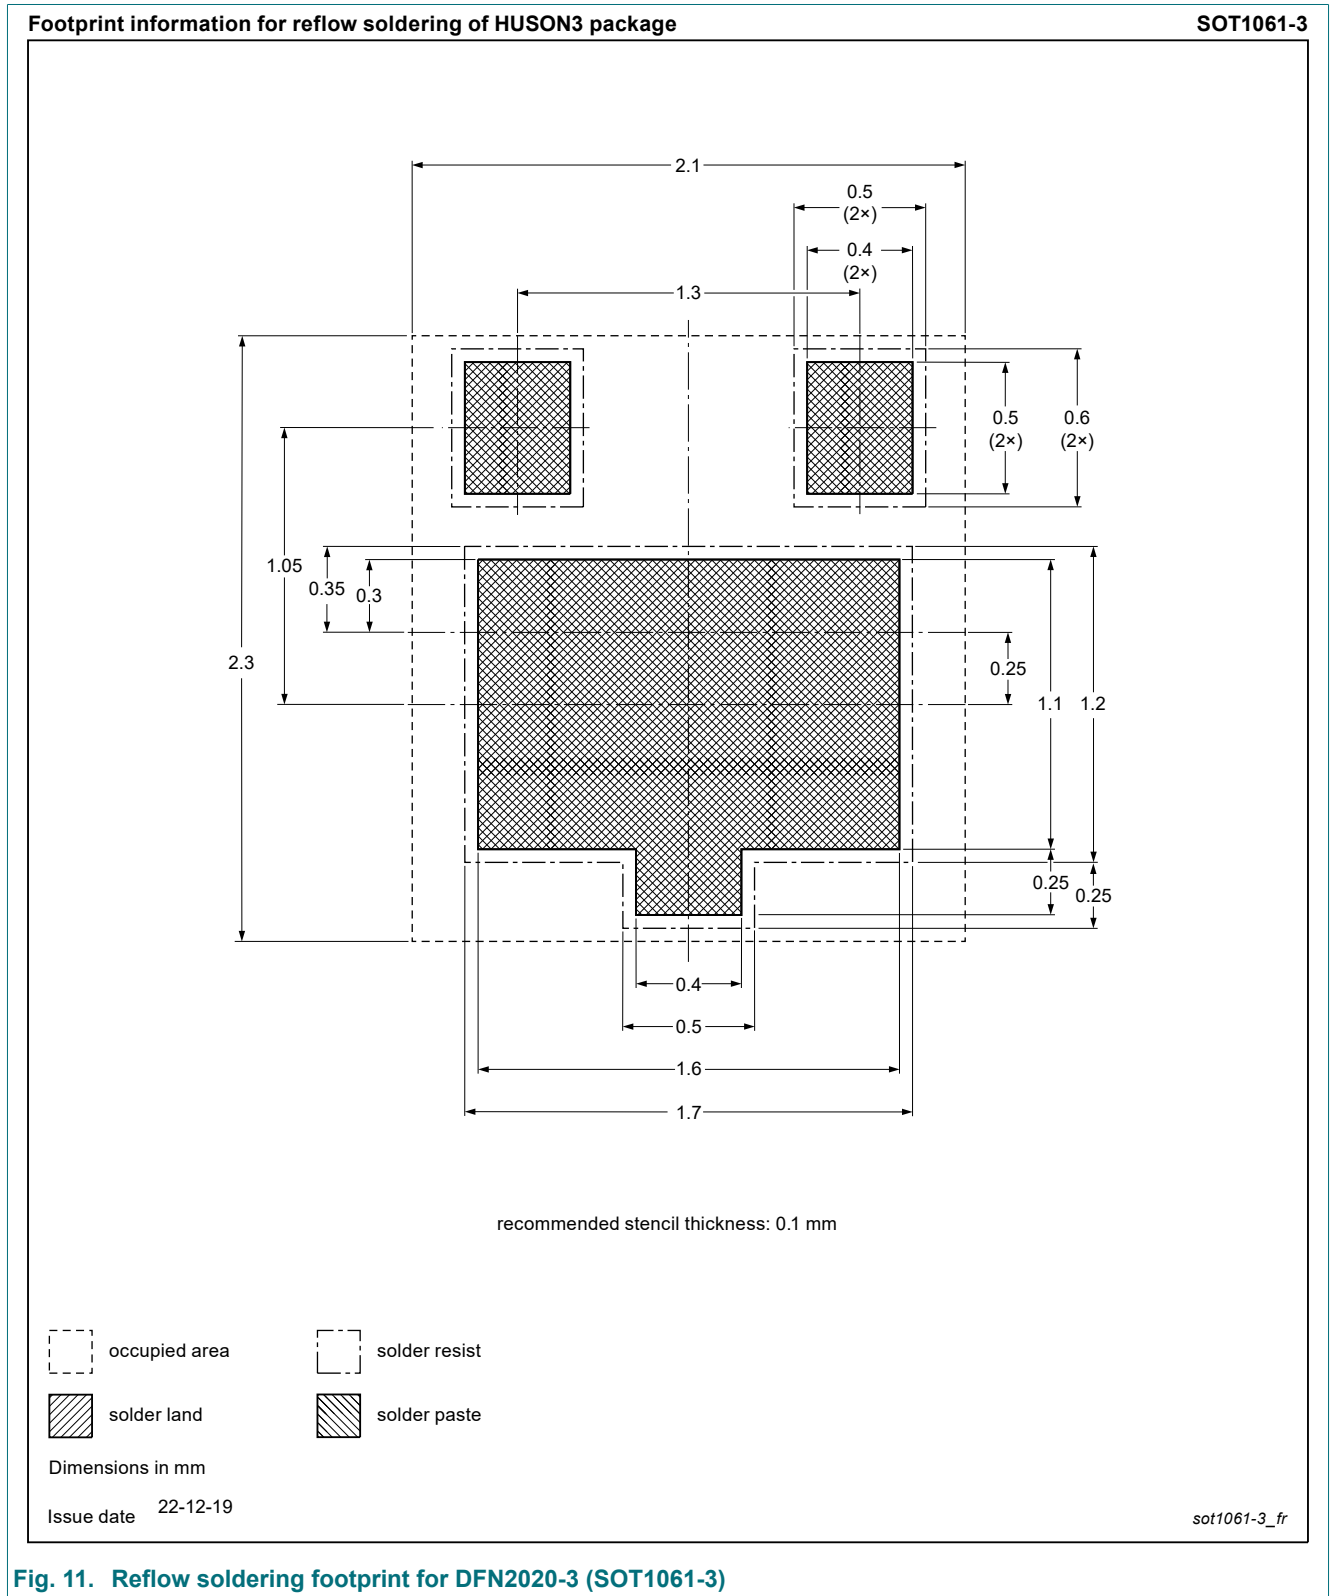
Reflow soldering footprint for DFN2020-3 (SOT1061-3)
